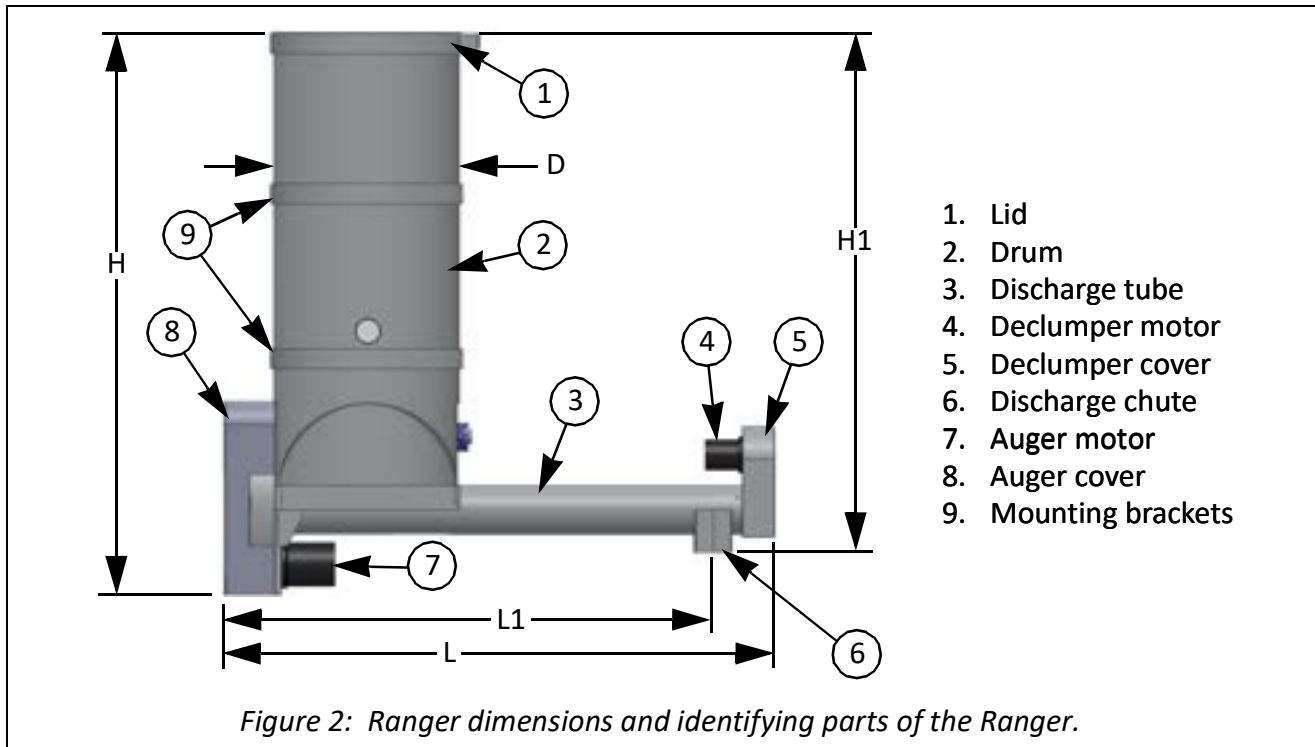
Ranger dimensions and identifying parts of the Ranger.
